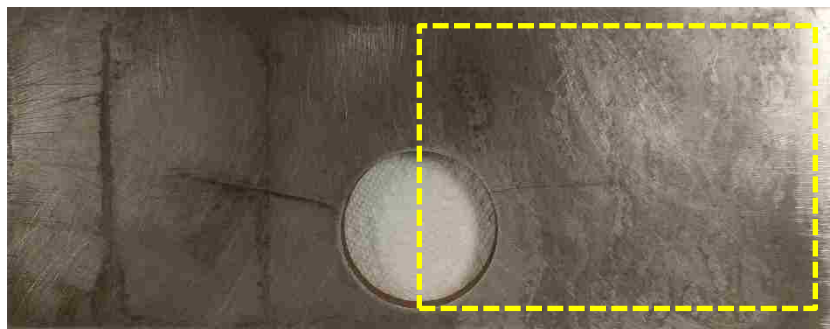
Sample 6 steel fatigue crack.
